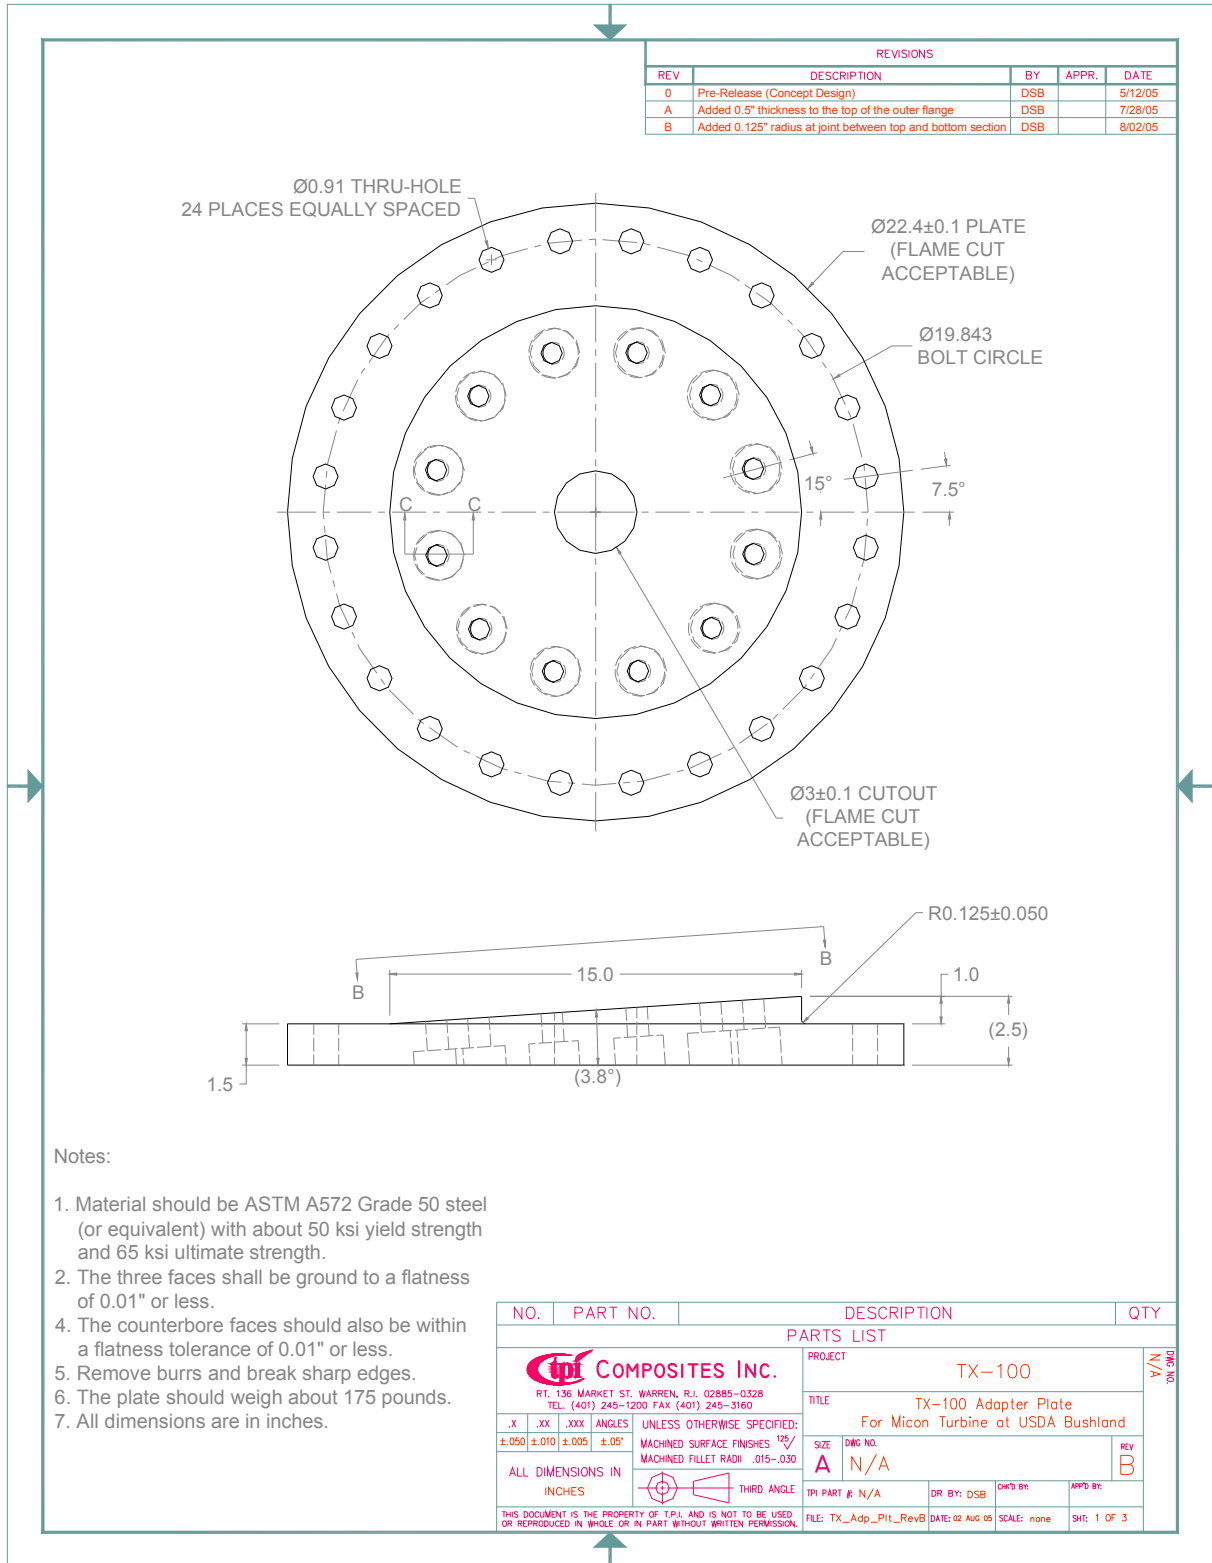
TX-100 Adapter Plate – Manufacturing Drawing (1)
